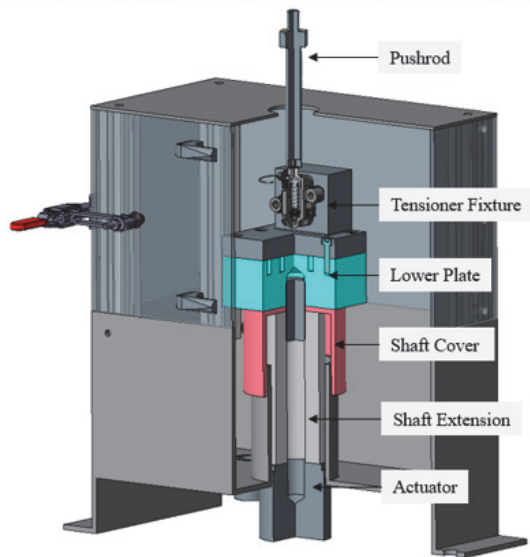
UTM & Fixture for hydraulic tensioner damping force
